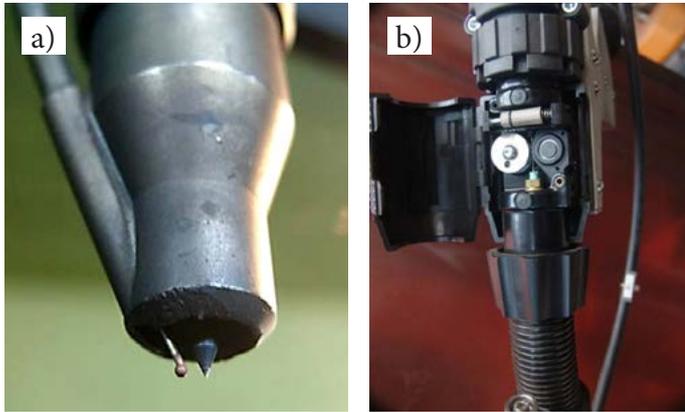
View: a) gas nozzle of the TOPTIG welding torch with the wire feeding conduit; b) wire feeder in the upper part of the TOPTIG welding torch
